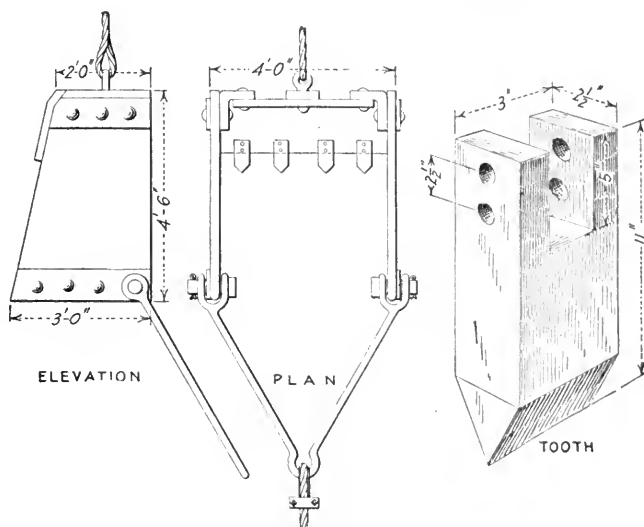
CONSTRUCTION OF SCRAPER AND DETAIL OF TOOTH.
